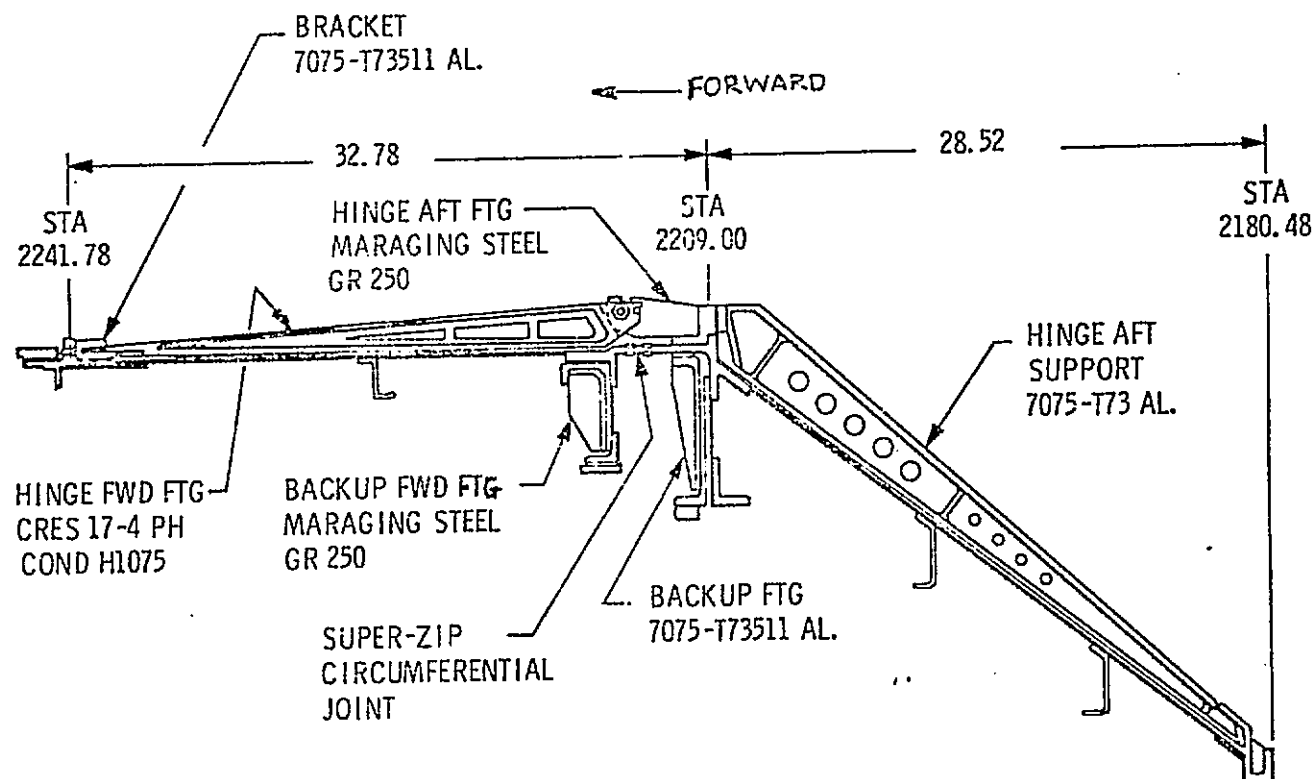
HINGE STRUCTURE ARRANGEMENT.
